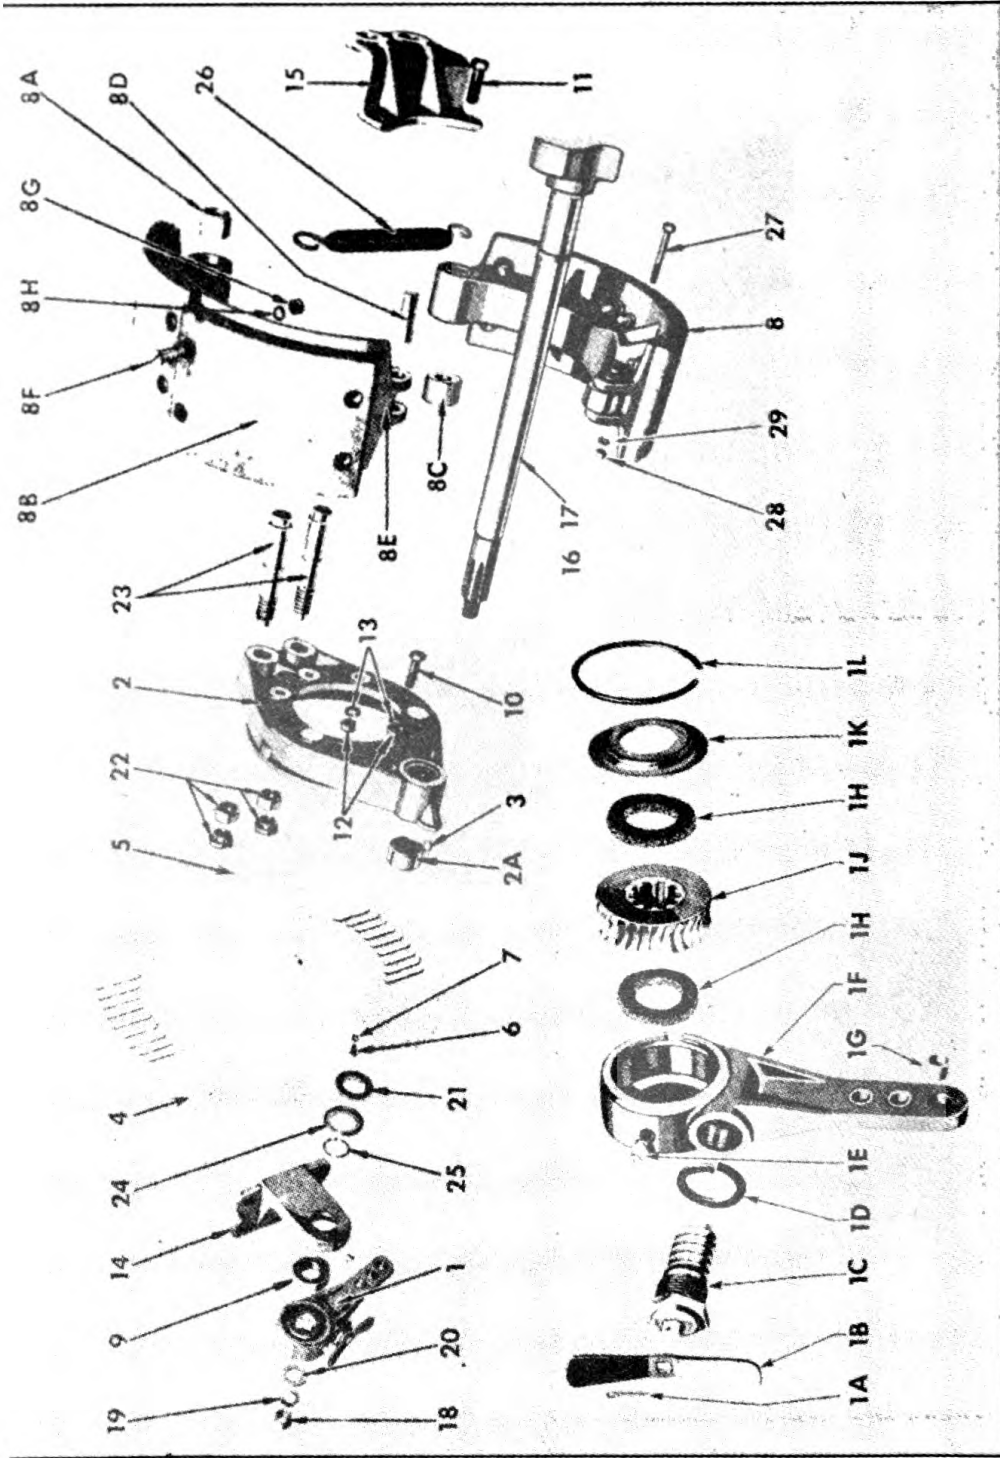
INTERNAL BRAKES—CONVERTER GEAR
